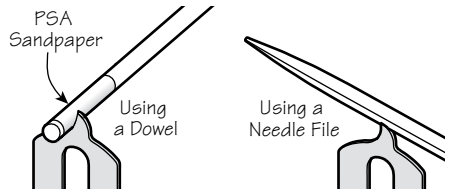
Techniques for sharpening a hook on inlay groove blade.
